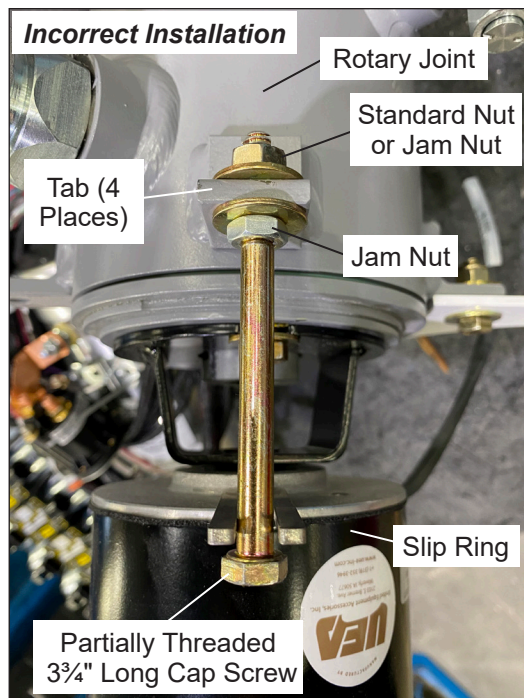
Partially Threaded 3/4" Long Cap Screw, Incorrect Top Nut Type
